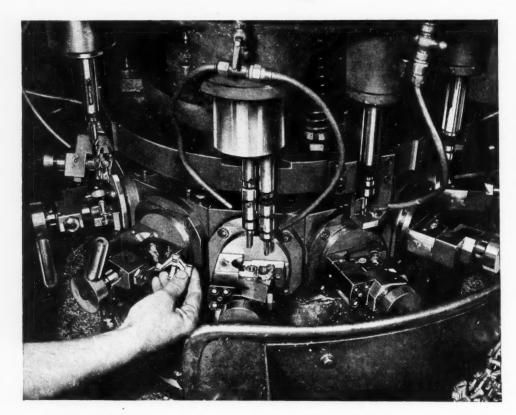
Close-up View of a Drilling Machine, Showing the Operator Placing a Die-casting in One of the Twelve Fixtures, which Index about the Vertical Axis of the Machine
